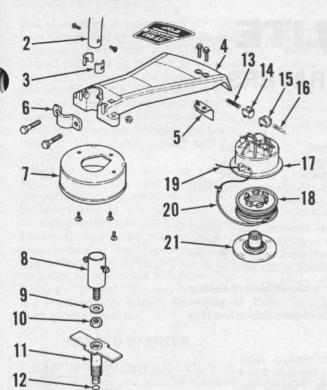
Exploded view lower head on Models ST-160 and ST-180.
